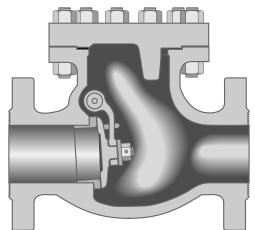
Flanged Figure 175½ Butt Weld
